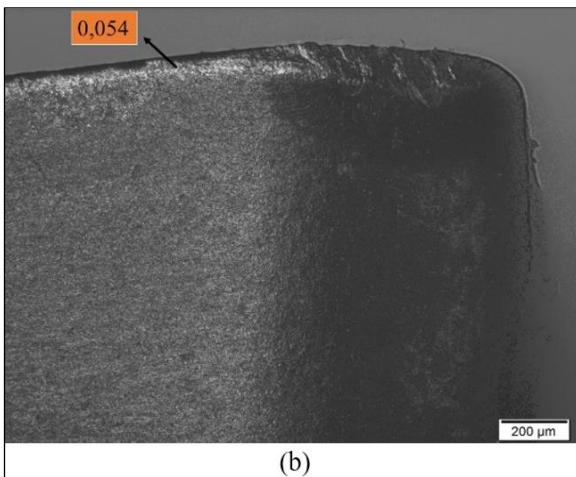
Wear on the secondary flank with insert 0,8 mm: (b) With sealant.
